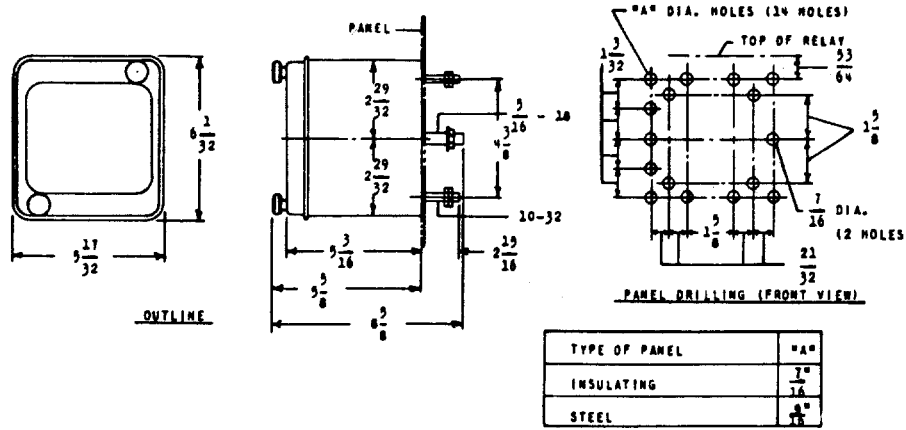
Outline and Panel Drilling Dimensions for Type HFA Relays in Standard Case
